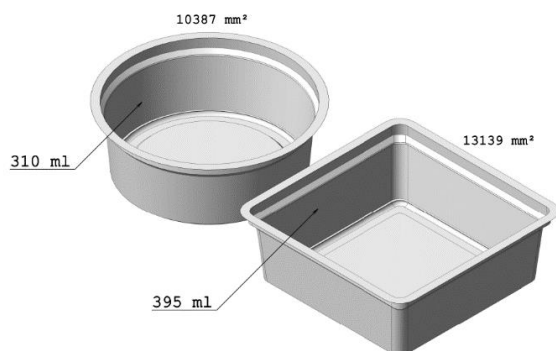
Shape optimization of RPET packaging, cylindrical to rectangular.
